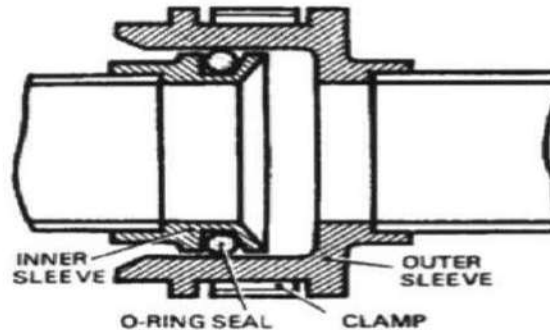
Sliding coupling Bonding and Drip Shields
